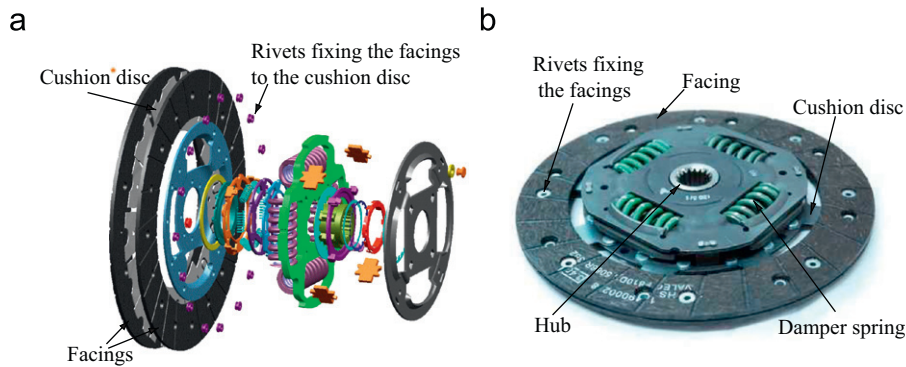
Detailed design of the riveted clutch disc: (a) Exploded view and (b) Assembled view.
